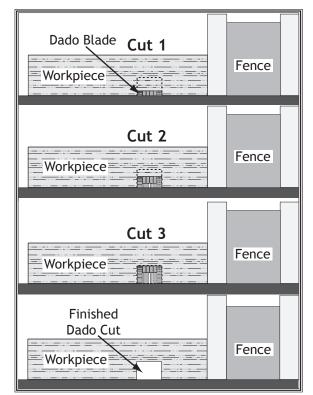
Example of dado being cut with multiple light cuts, instead of one deep cut.
